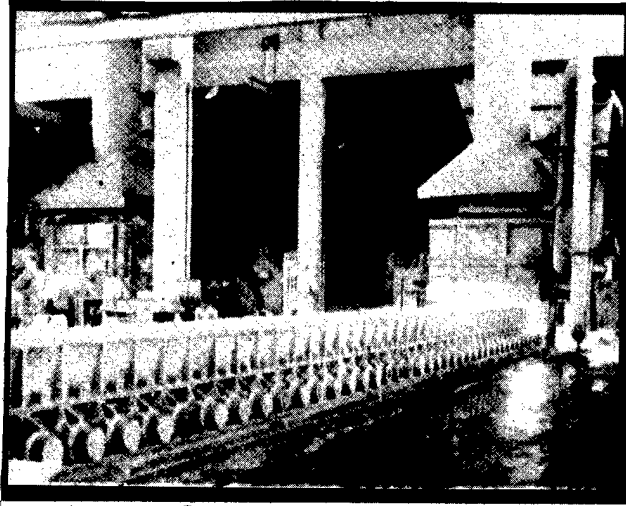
A piece of sintering equipment at the Tangshan Metallurgical Mining Machinery Plant in Hebei
